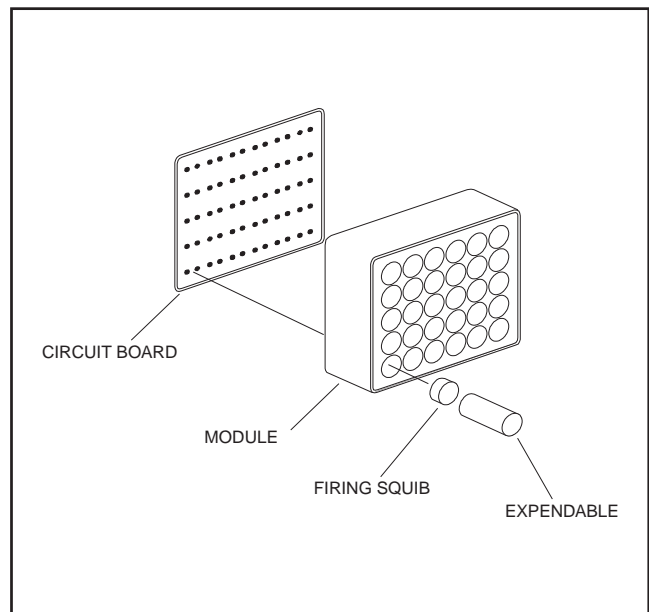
D-27/ALE-29A Dispenser Module Loading
